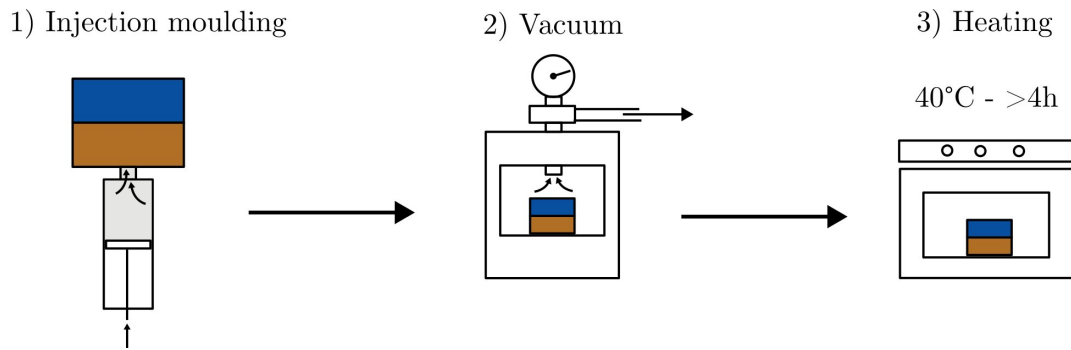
General process used to manufacture the flexible membranes and valves. Silicone rubber is injected in the moulds with a syringe. The moulds are then placed in a vacuum chamber to remove air bubbles. Finally, they are heated at 40 °C during four hours to cure the silicone rubber.
